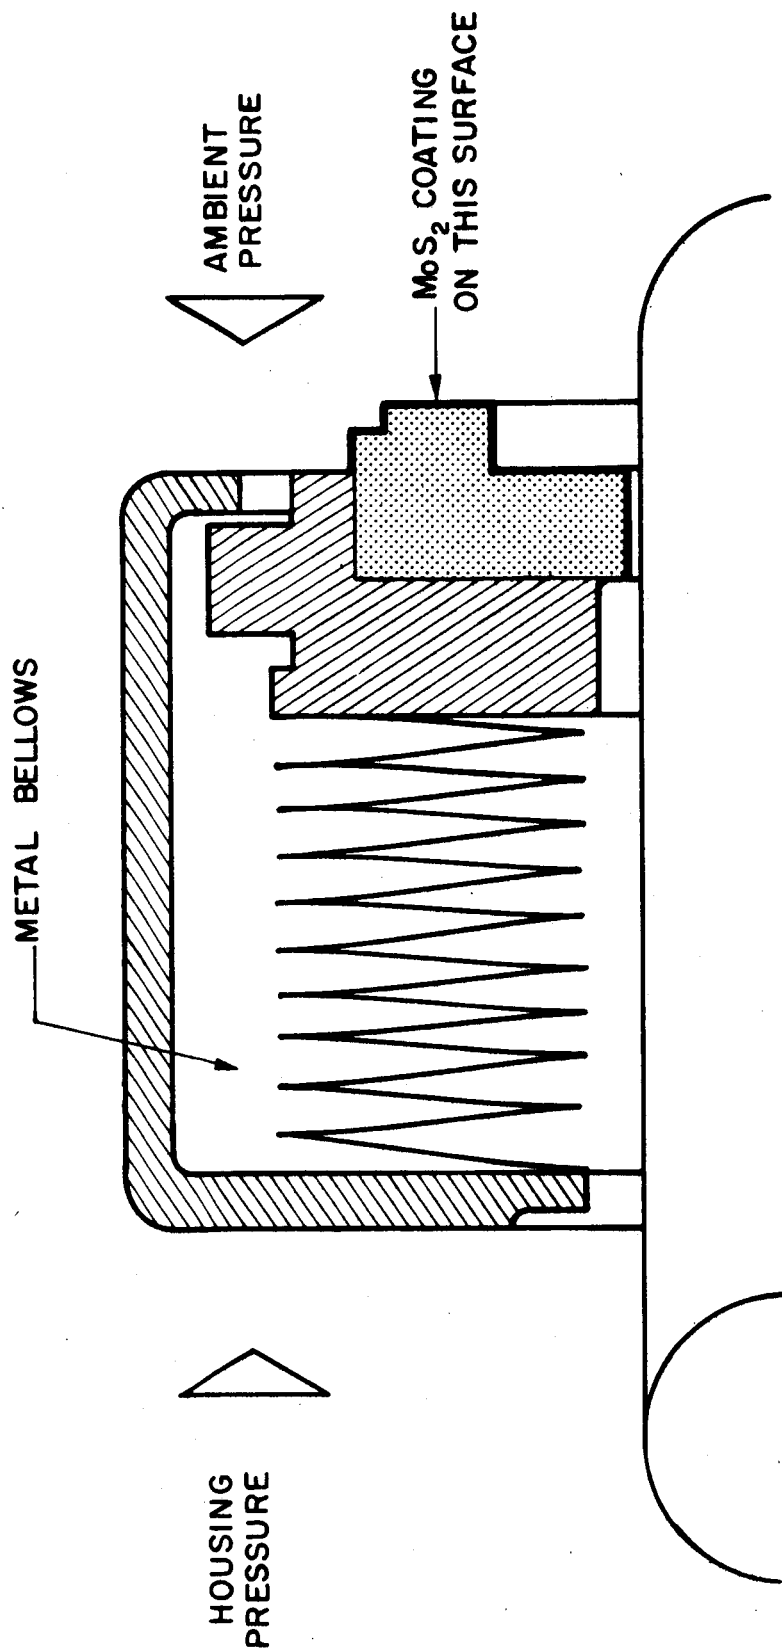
METAL BELLOWS SHAFT SEAL
